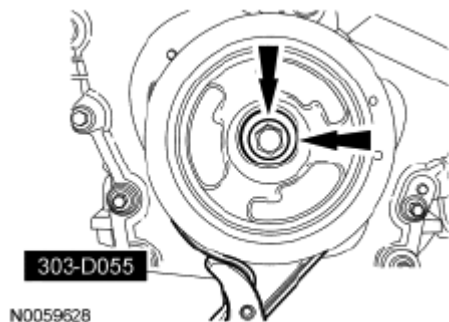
Locating Crankshaft Pulley Bolt & Washer
